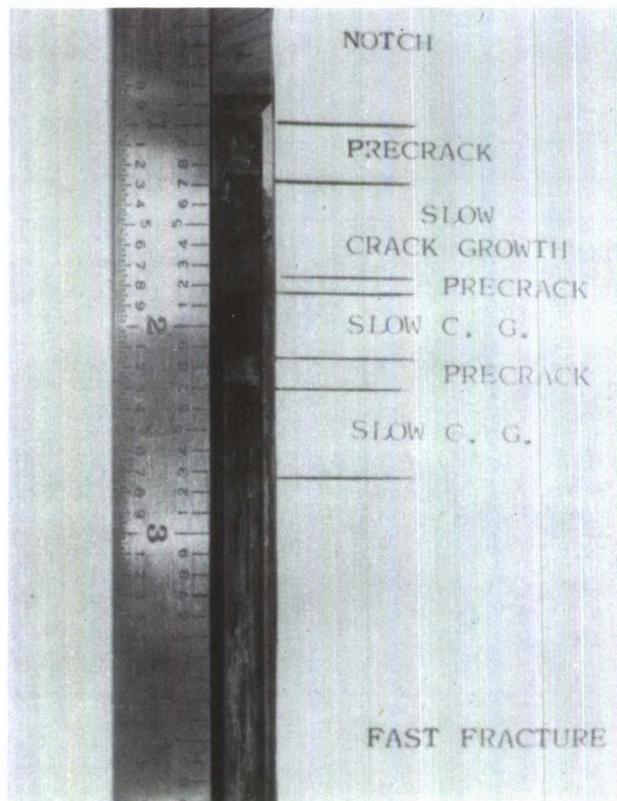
Fracture Surface of a Statically Loaded Mostovoy DCB Crack Growth Specimen Tested in Distilled Water
